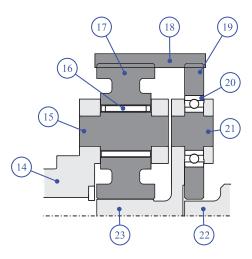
Side cut view of the gearbox multiplier. First stage: Input shaft/carrier (14), pin [ $\times$ 3] (15), needle bearing [ $\times$ 3] (16), planet [ $\times$ 3] (17). Second stage: Planet [ $\times$ 3] (19), ball bearing [ $\times$ 3] (20), pin [ $\times$ 3] (21), carrier (23). Outer ring gear (18), rotor (22).
